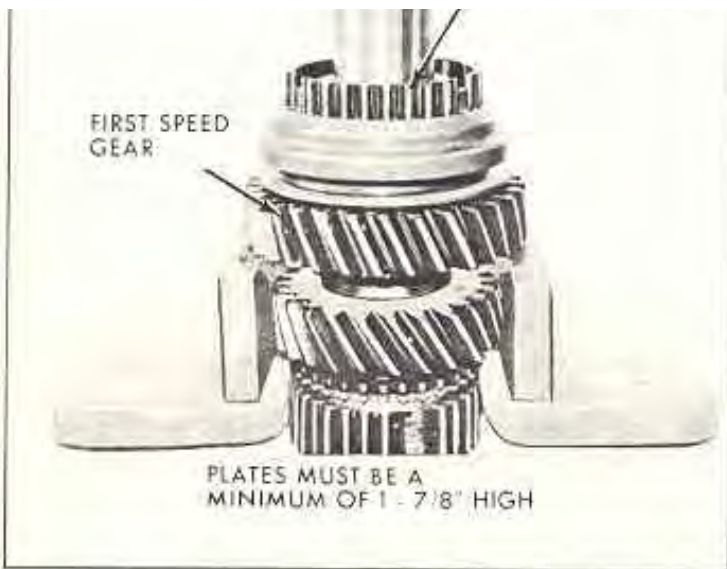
B-17 Removing First Speed Synchronizer and Gear
